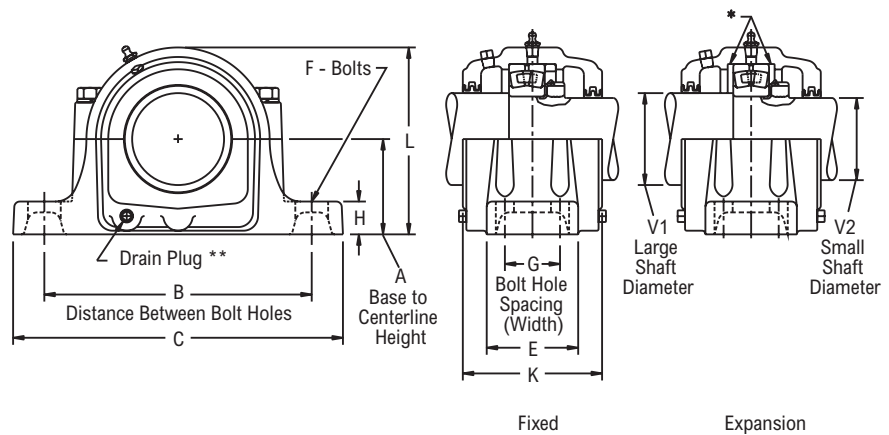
Bolt Spherical Roller Bearing Two-Piece Pillow Block Unit
